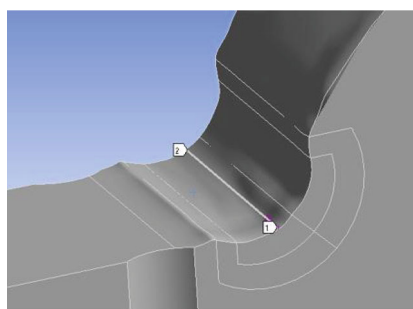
Schematic view of angular misalignment measurements of as-welded samples
